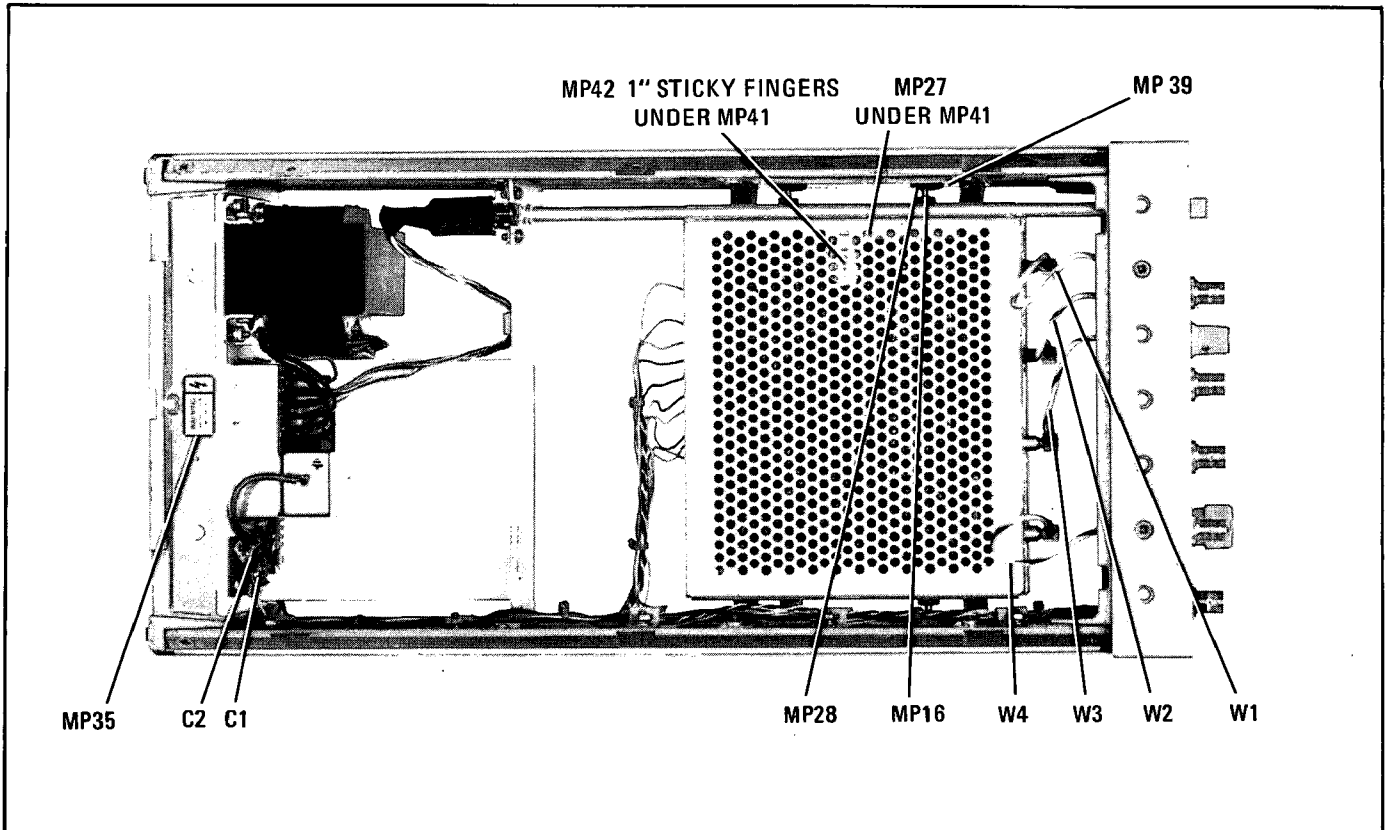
Bottom Chassis Parts, Mechanical Parts, and Cable Identification
